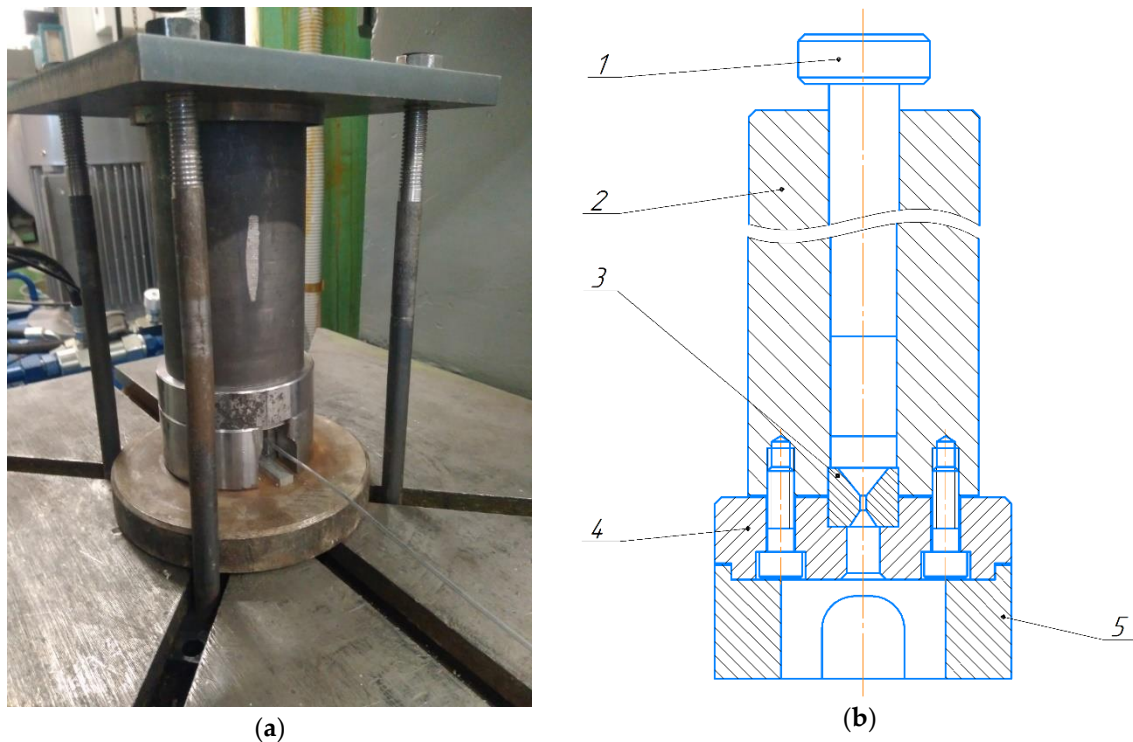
Extrusion tool: (a) photo tool; (b) tool drawing: 1 - ram; 2 - container; 3 - die; 4 - clamp; 5 - saddle.
